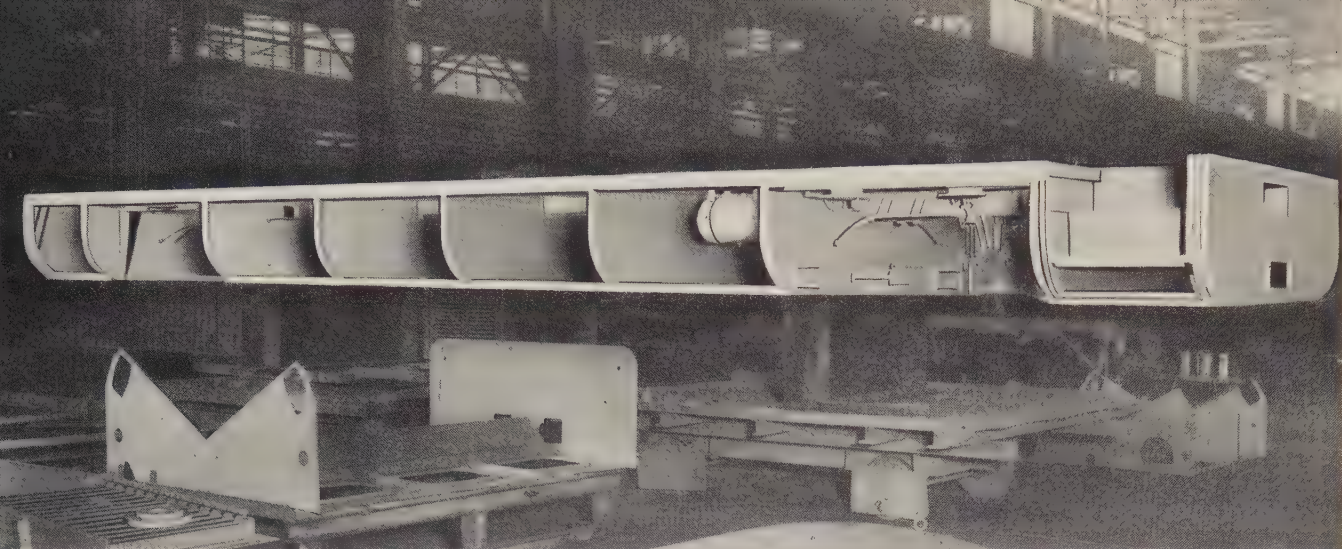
The strong, steel car underframe provides support out to the sides of the passenger car. Under-floor compartments provide space for heavy baggage and housing of the individual heating and air conditioning units and other equipment.
